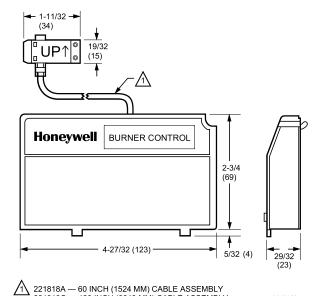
Connector cover, connector dimensions, and cable length in in. (mm).
